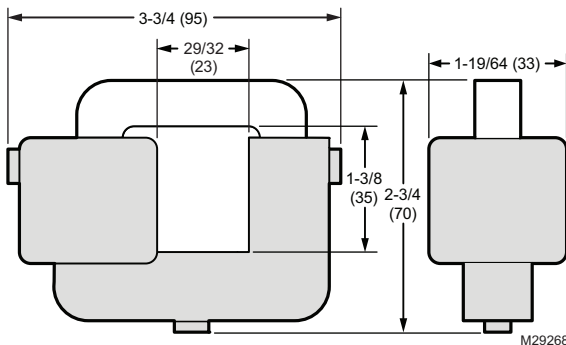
100 & 200 Amp current sensor dimensions in in. (mm).
